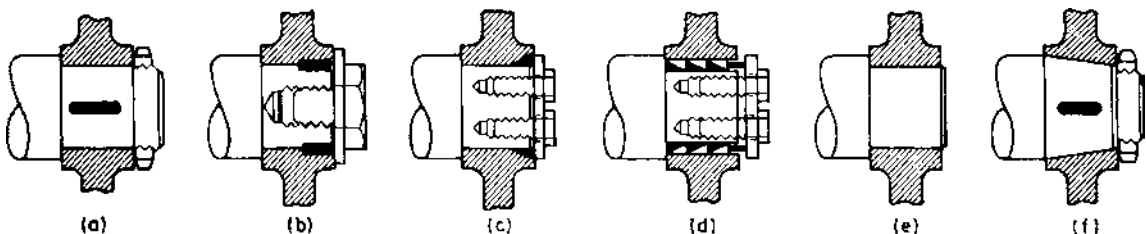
Flangeless methods of hub mounting for crankshaft vibration dampers: (a) parallel with key (b) parallel with dowel pins (c) parallel with wedge ring (d) parallel with wedge rings (e) parallel interference (f) taper with key
